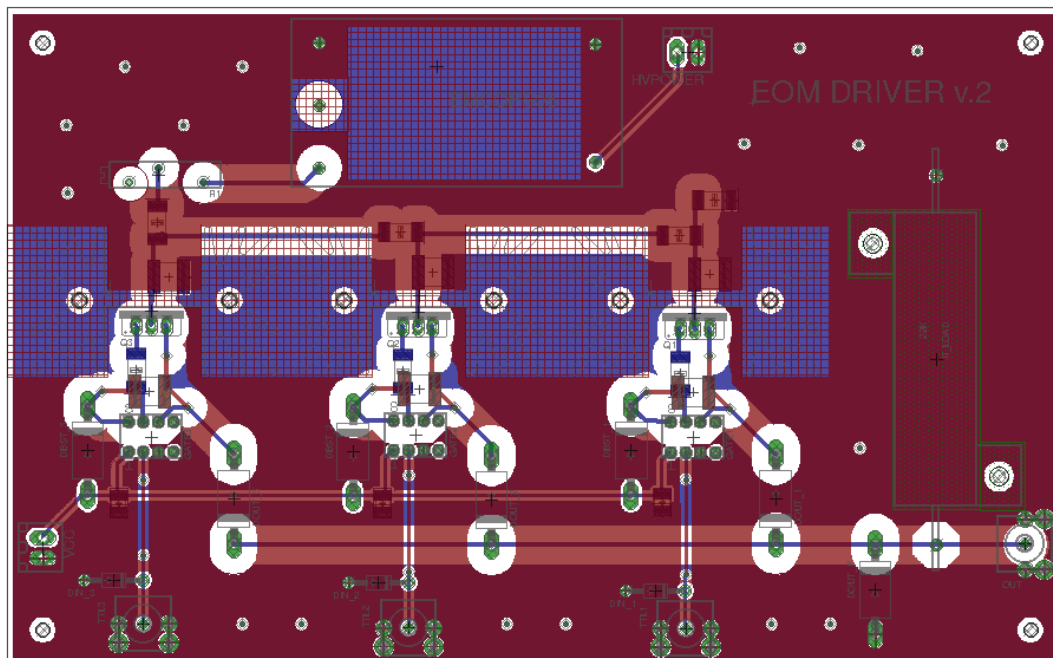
PCB layout: top layer (red) and bottom layer (blue)
